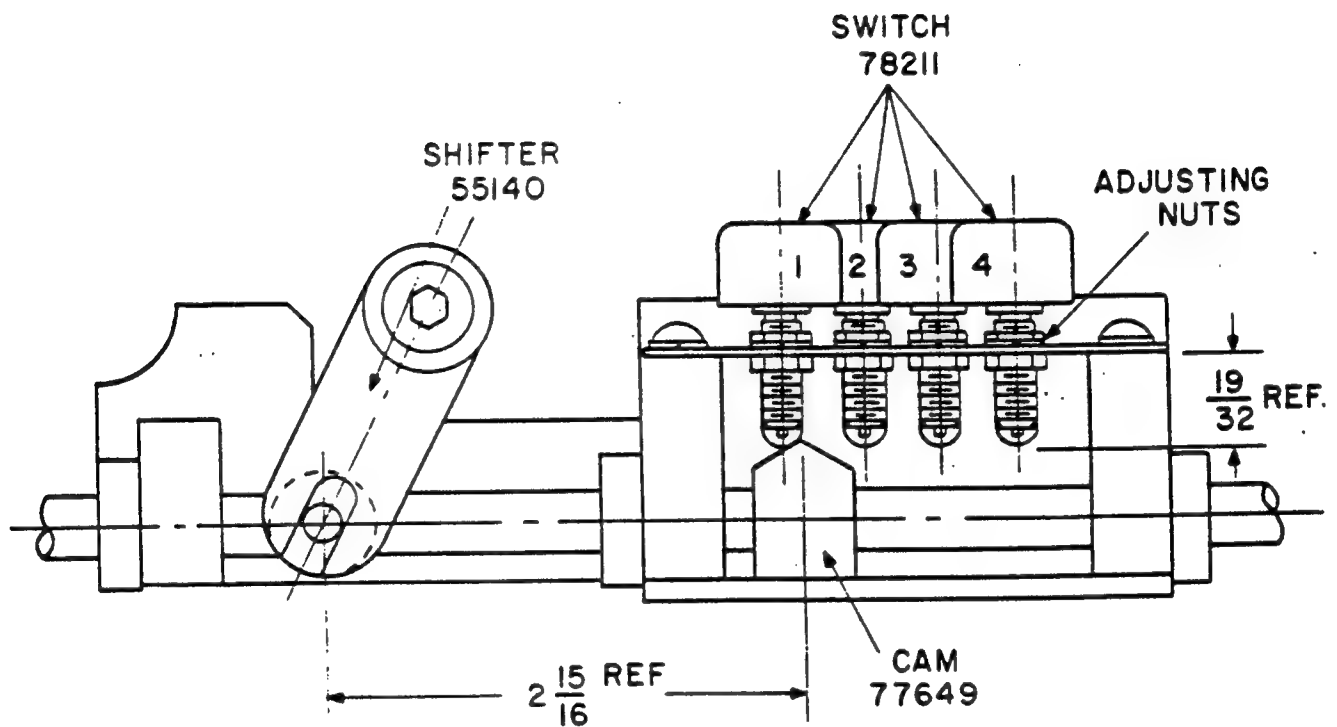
SELECTOR ASSEMBLY SWITCH ADJUSTMENT.
